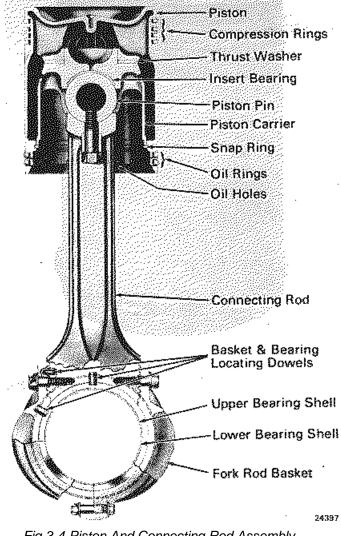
Piston And Connecting Rod Assembly, Cross-Section
